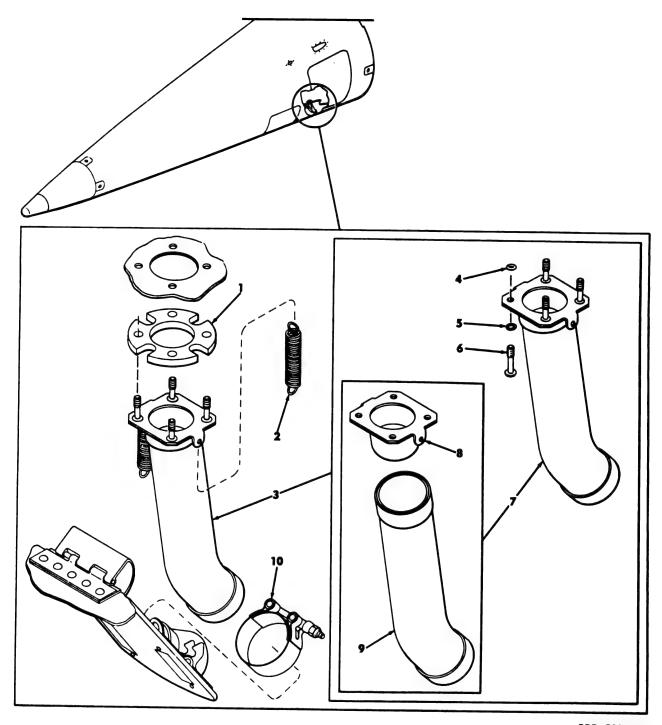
EQUIPMENT INSTALLATION, FORWARD BODY ASSEMBLY /9020575 AND 9979613/ /SEE FIGURE 33 FOR NEXT HIGHER ASSEMBLY/
